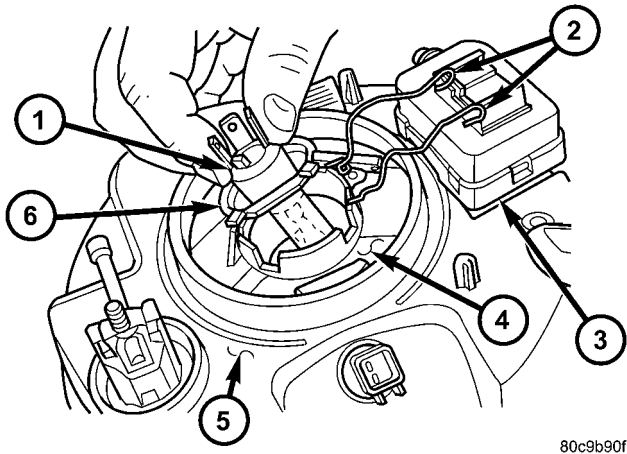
Headlamp Bulb Retainer Clip Engage/Disengage
